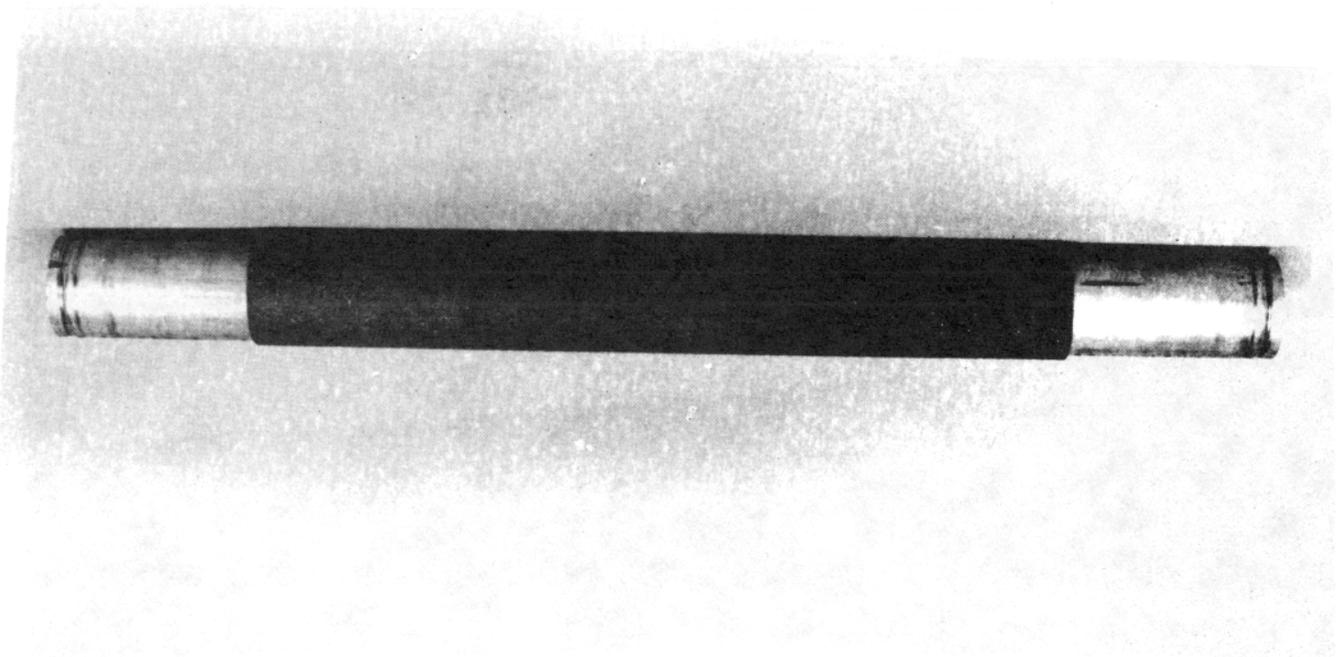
TYPICAL 3M COATED ALUMINUM TUBE BEFORE TEST
